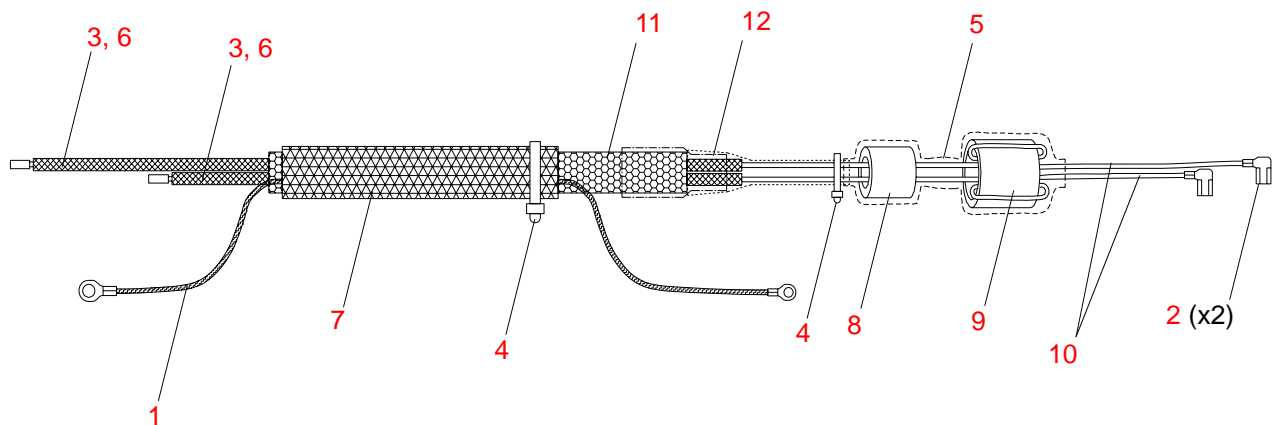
VL500 80V Main Harness Cable Assembly (VL500 80V)
